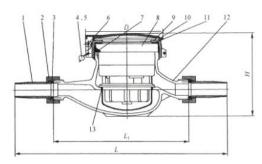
Structure diagram of rotary water meter 1-Takeover; 2-Connection nut; 3-Takeover sealing gasket; 4-Lead seal; 5-Copper wire; 6-Pin; 7-0-shaped sealing gasket; 8-Impeller metering mechanism;9-cover; 10-cover; 11-cover liner; 12case; 13-Bowl filter screen;
